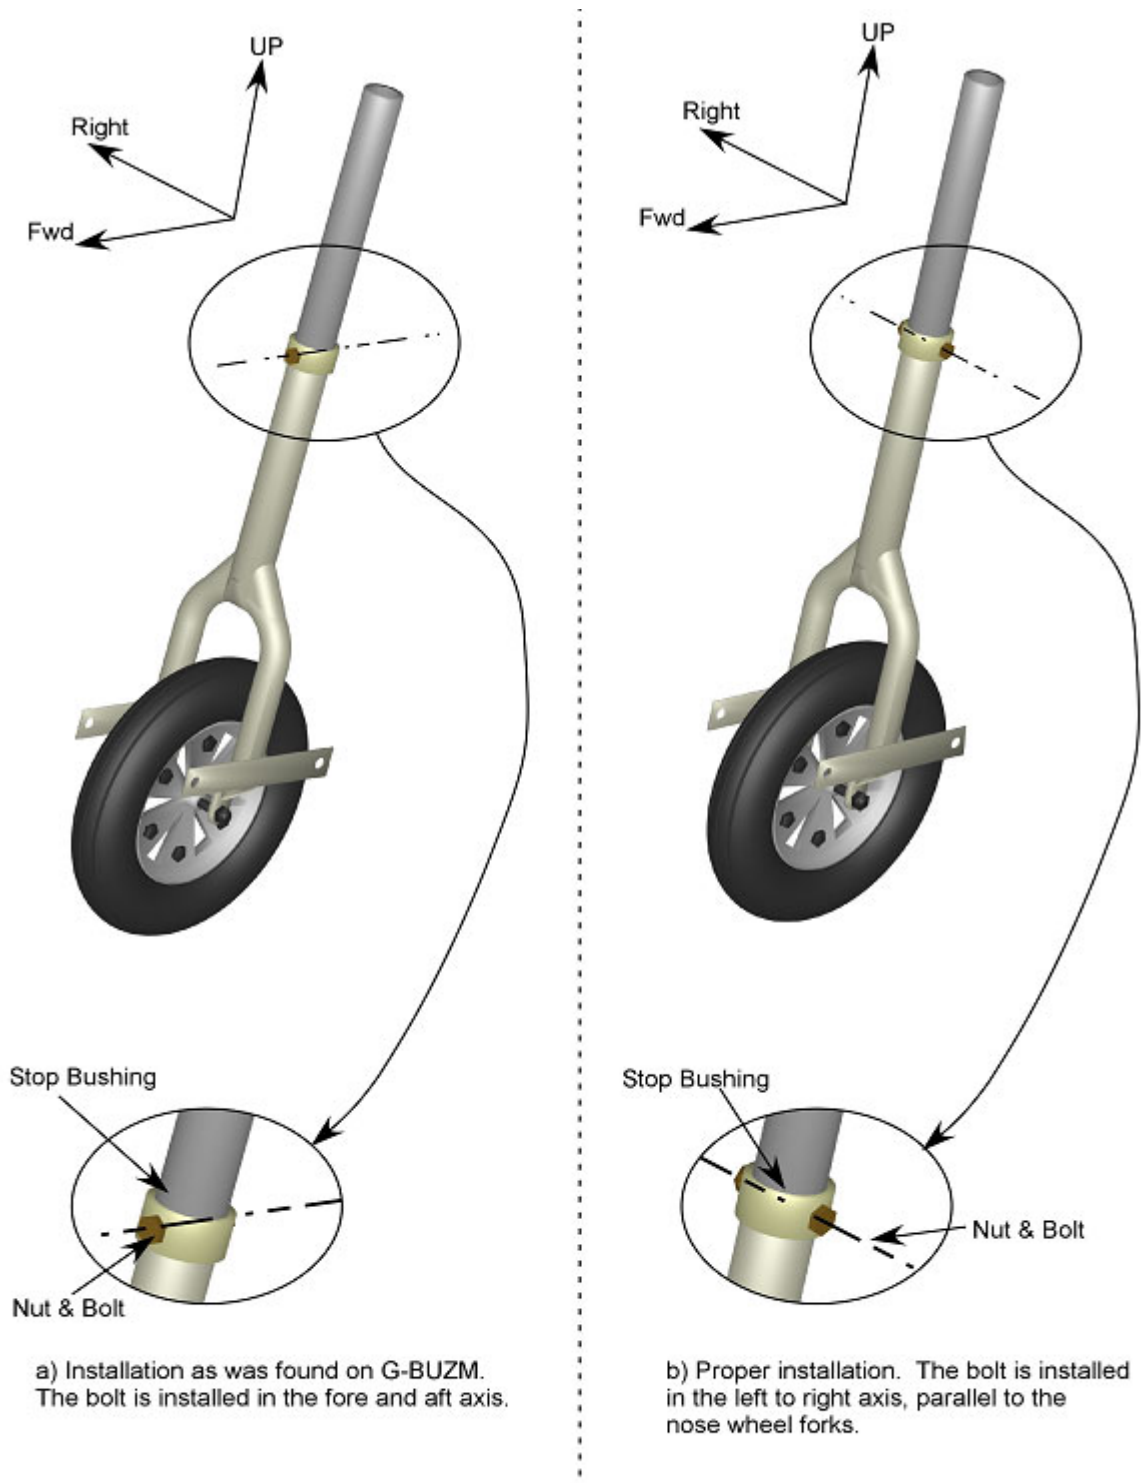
Gear Installation representation showing the stop bushing and bolt orientation.
